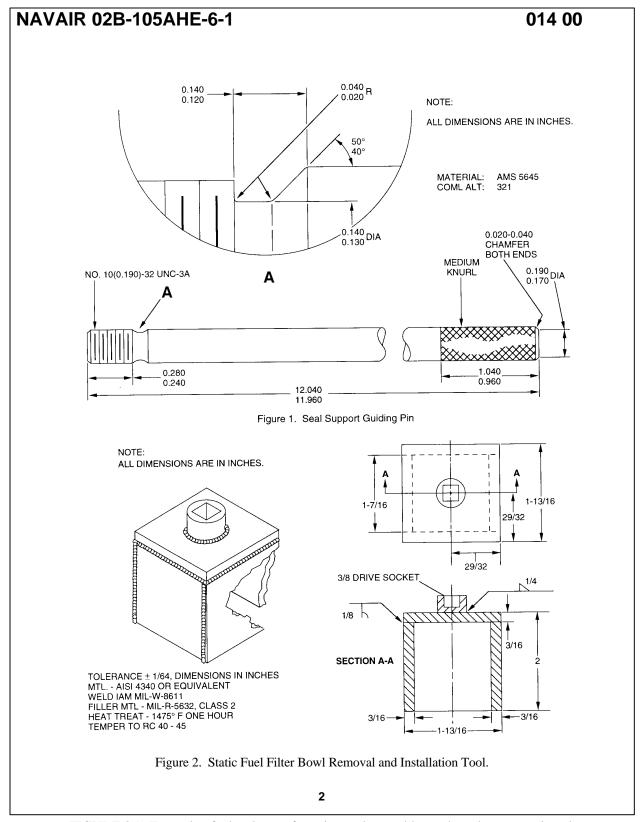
Example of a local manufacturing and assembly work package - continued.
